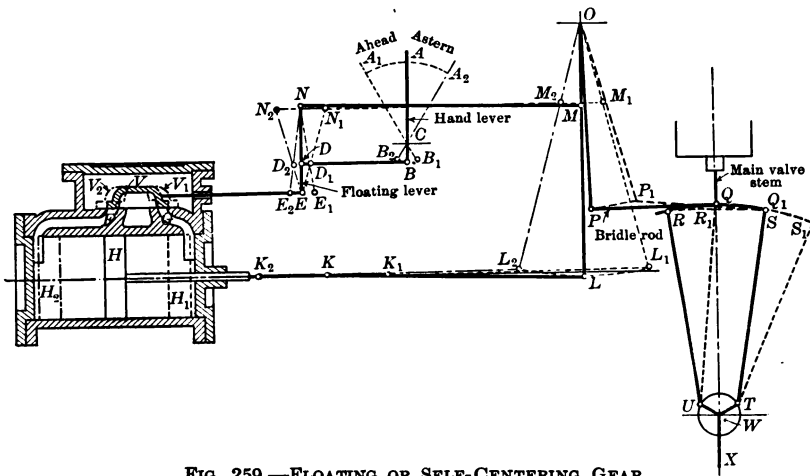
FLOATING OR SELF-CENTERING GEAR
